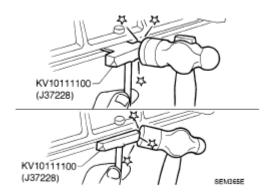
Inserting Seal Cutter Between Oil Pan (Upper) And Oil Pan (Lower)
